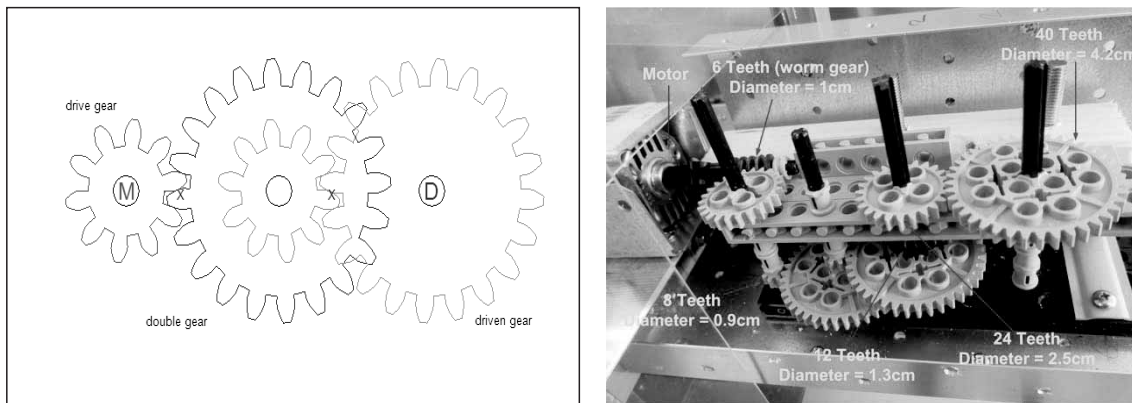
Gear Principle and Snap Shot of Gears (Lego) Used in Robotic Vehicle
